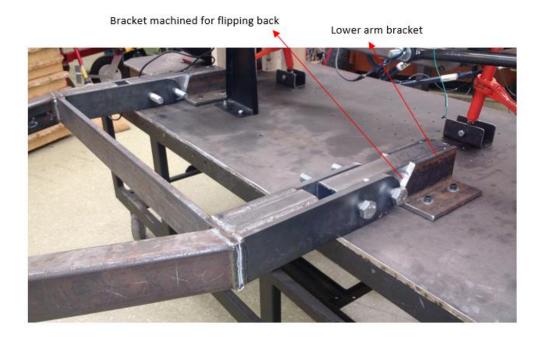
The lower arm holding bracket and the machined edges for flipping back safely
